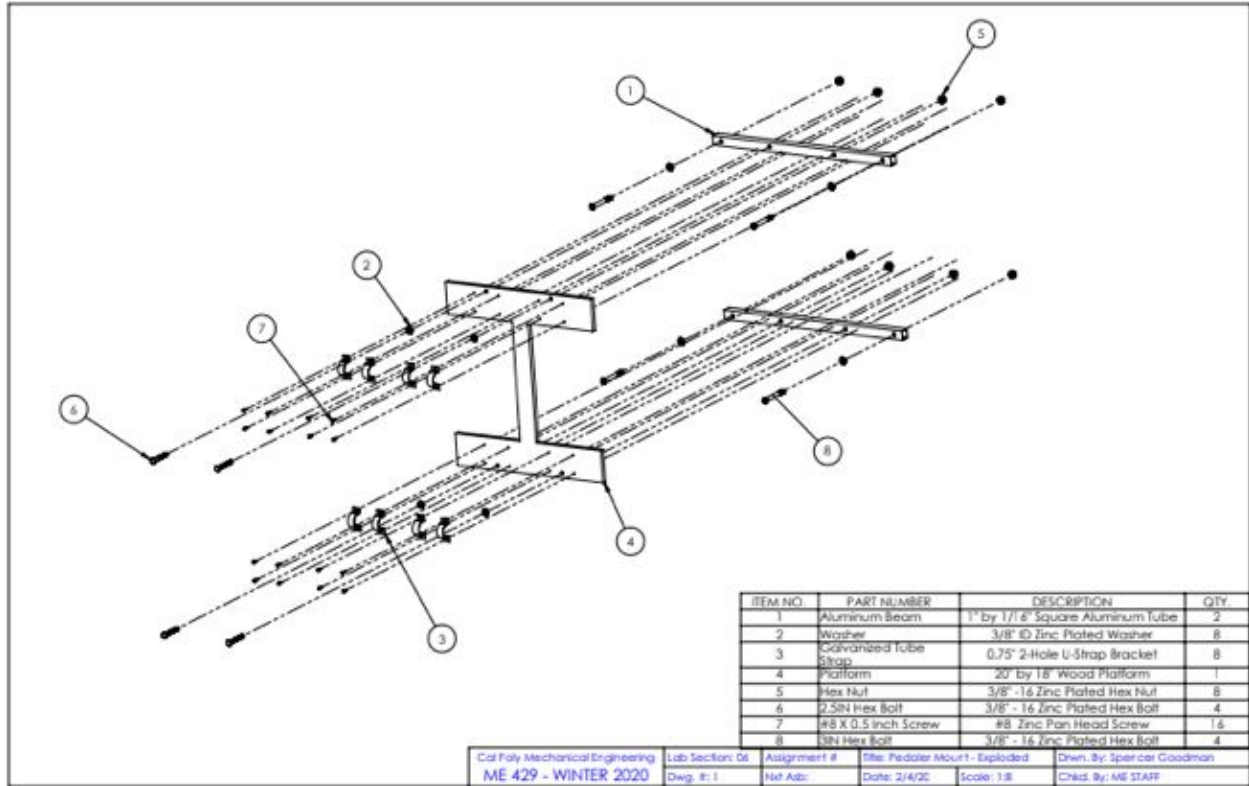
Exploded Subassembly of the Pedaler Mount
